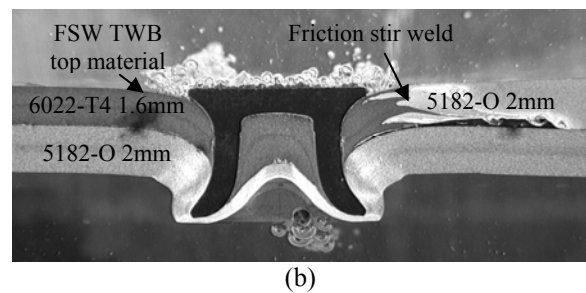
Photograph illustrating the cross section of the joint assembly where the SPR is piercing through the 6022-T4 sheet in the HAZ region of the TWB.
